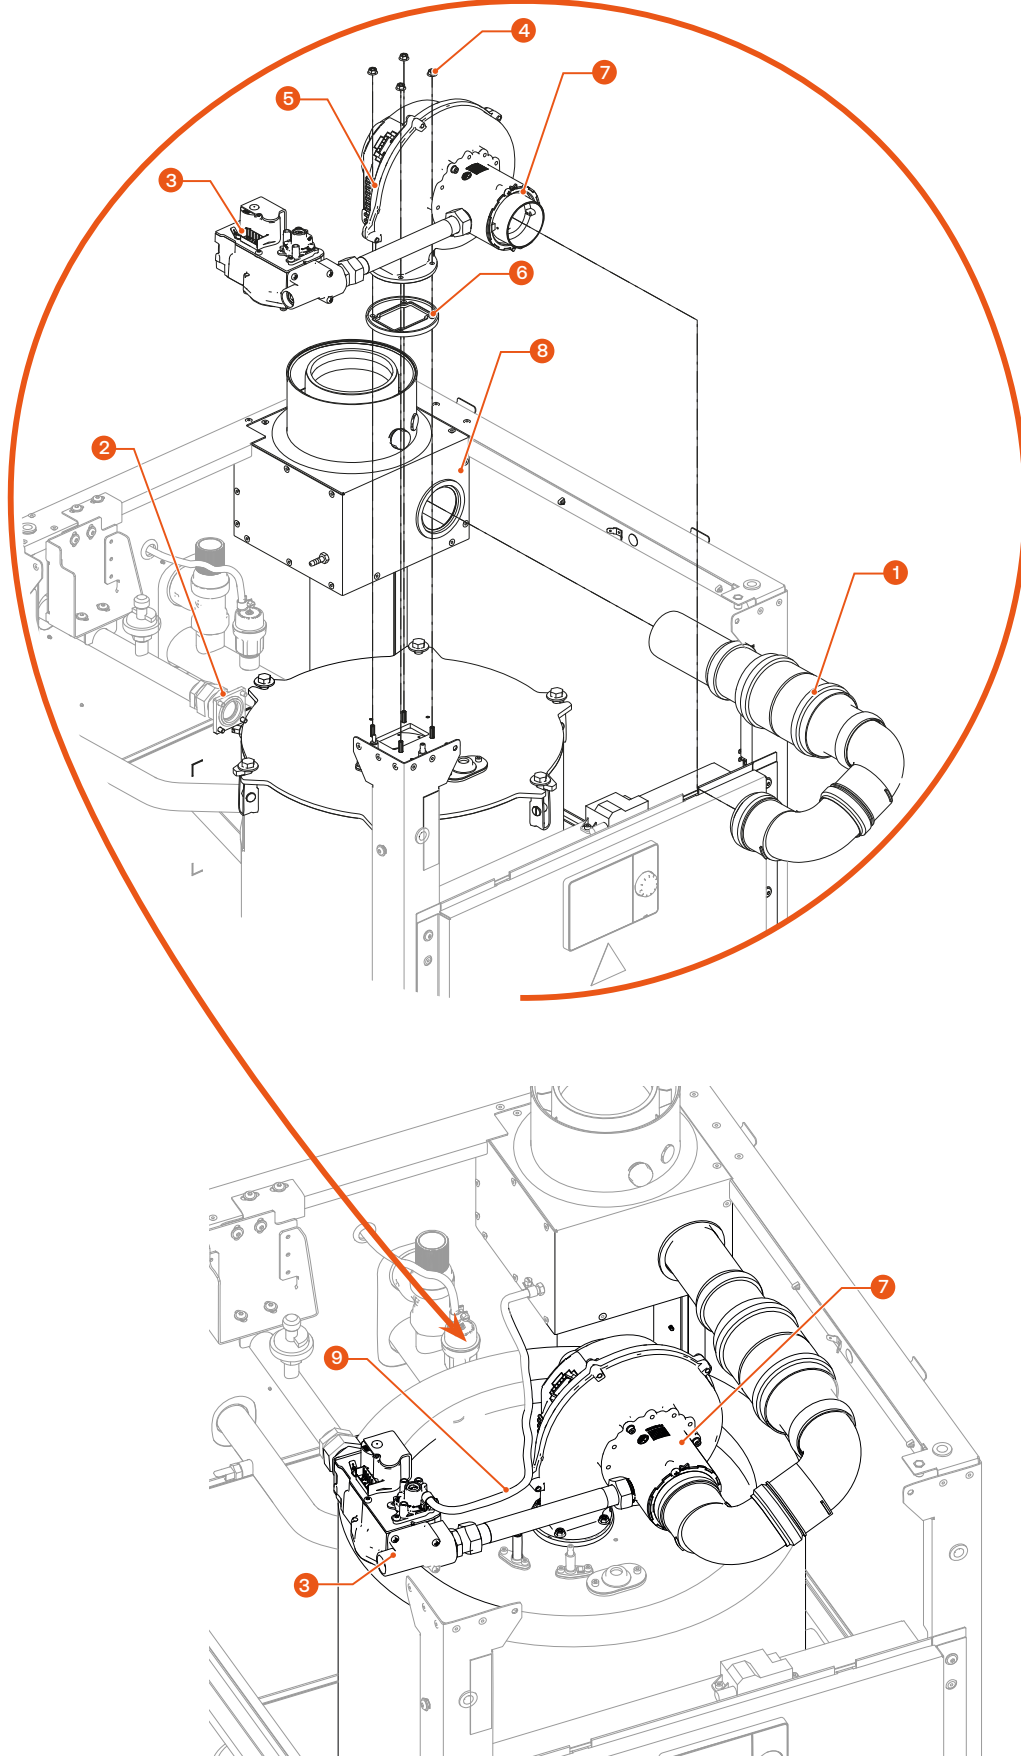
Removing and Installing the Fan and Air-Gas Mixer Assembly
